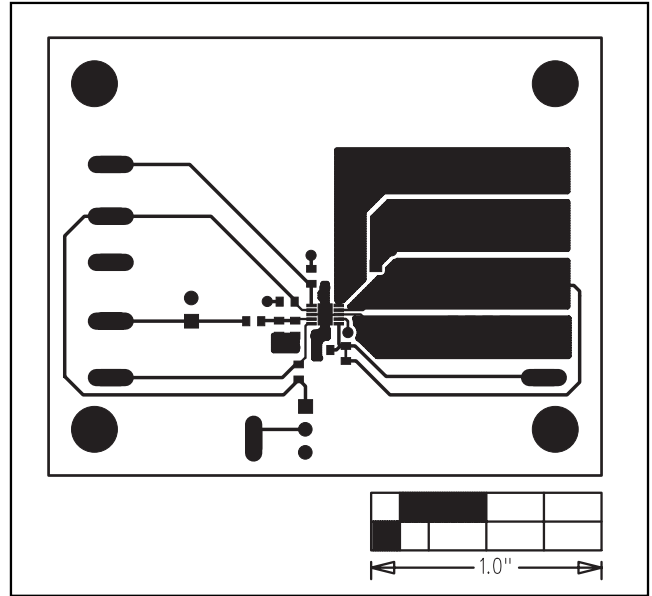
MAX1510 EV Kit PC Board Layout—Component Side
